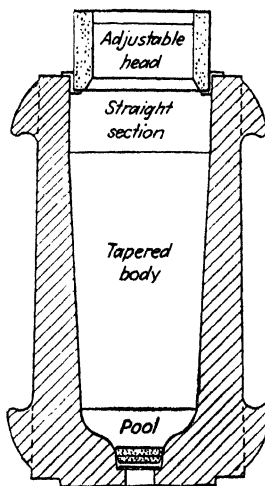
VII.—Big-end-up ingot mold equipped with adjustable sinkhead. (Courtesy of The Gathmann Engineering Co.)
